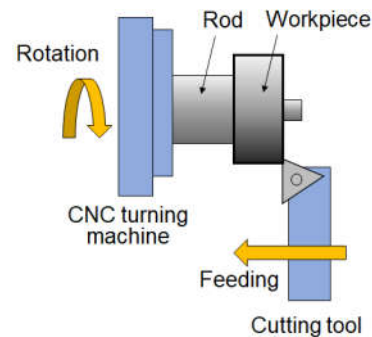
Method of turning workpiece. The side surface of the cylindrical workpiece made from sintered steel was turned.
